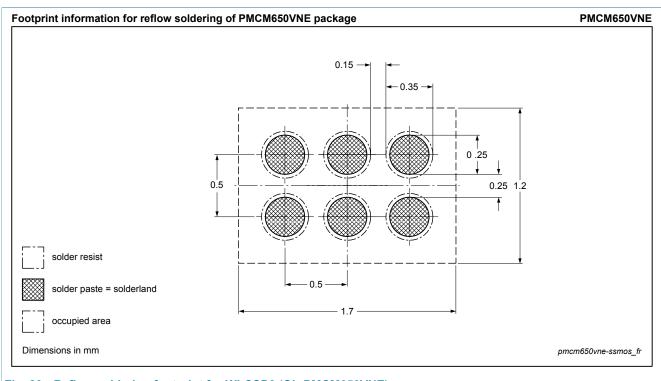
Reflow soldering footprint for WLCSP6 (OL-PMCM650VNE)
